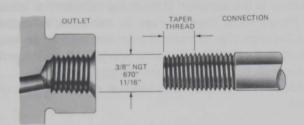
CONNECTION 240 3/8"-NGT RH INT IPS accepting Tapered Threaded Pipe
